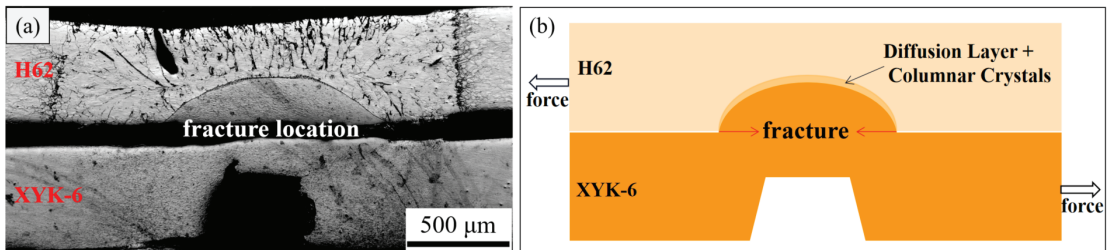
(a) Photograph of the fractured specimen and (b) schematic of the fracture.
